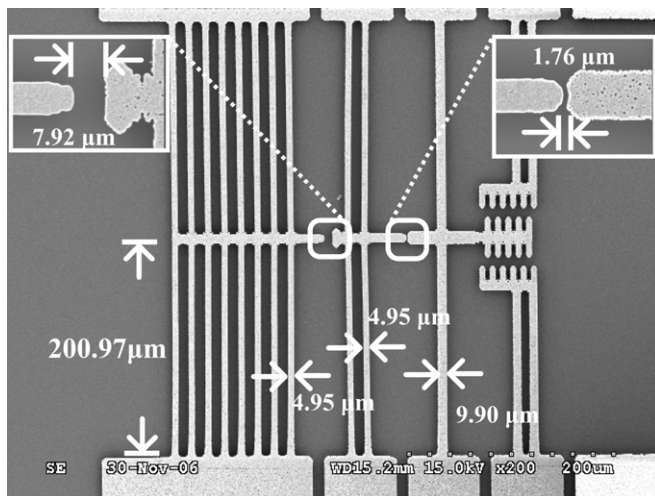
The SEM pictures of the fabricated micro welding structure before welding.
